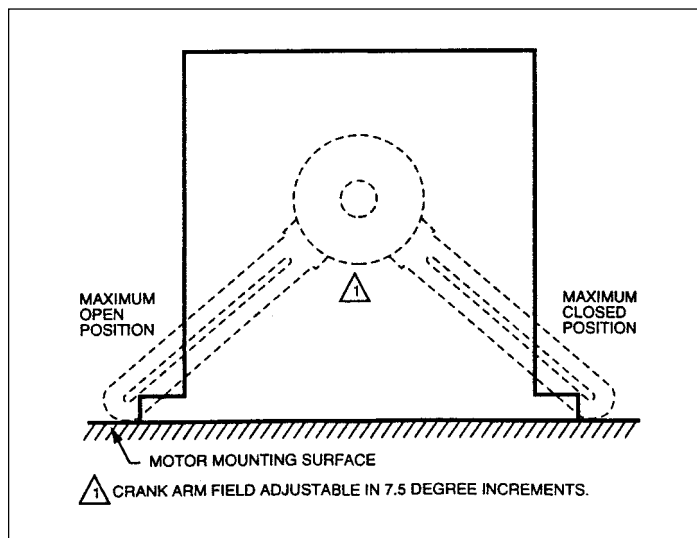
LIMITS OF CRANK ARM ROTATION.
